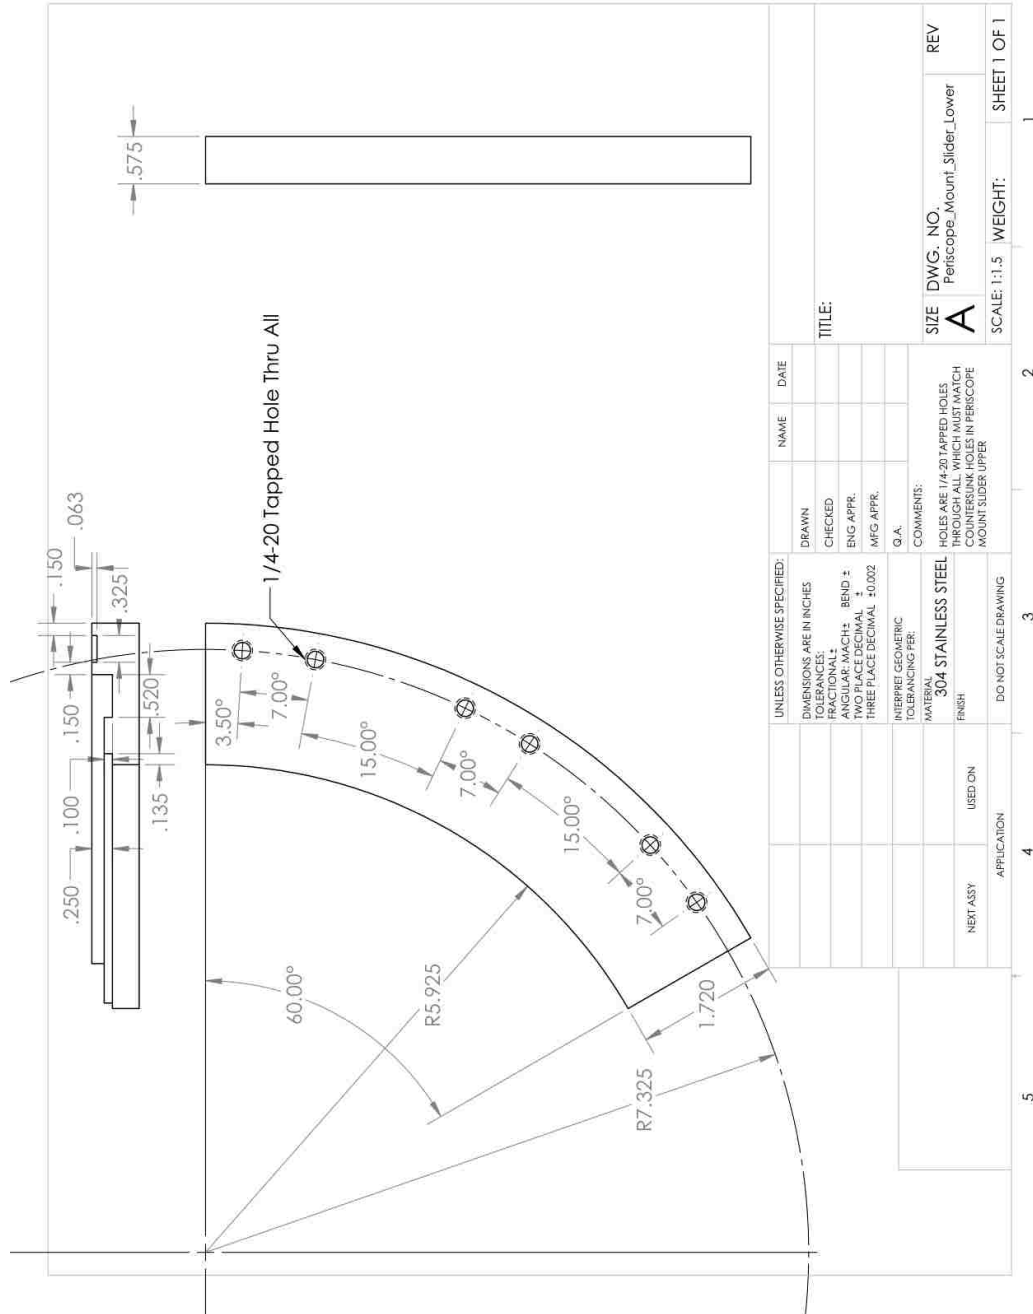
Drawing of the lower portion of the slider for the periscope mount. This part was silver plated to reduce surface friction.
